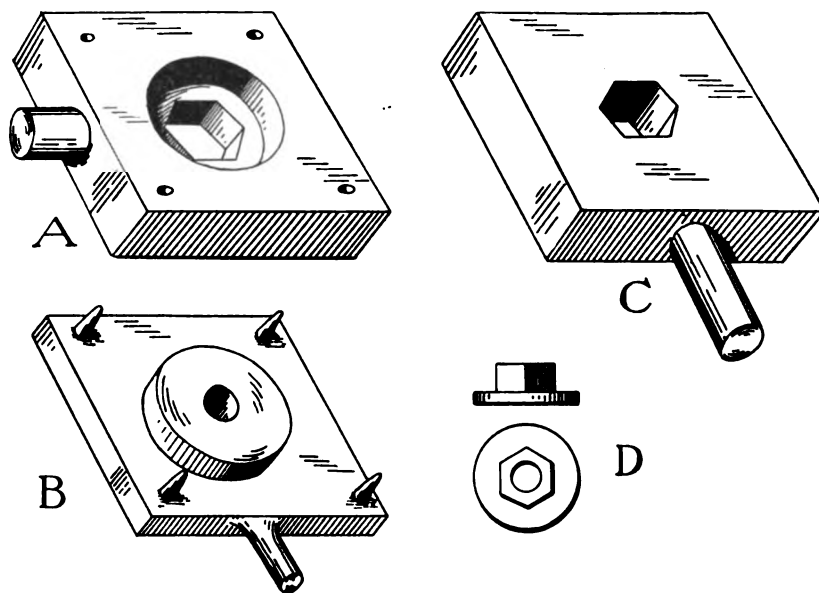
TOOLS FOR MAKING KNUCKLE JOINT PIN NUTS. D.—THE FINISHED NUT.
